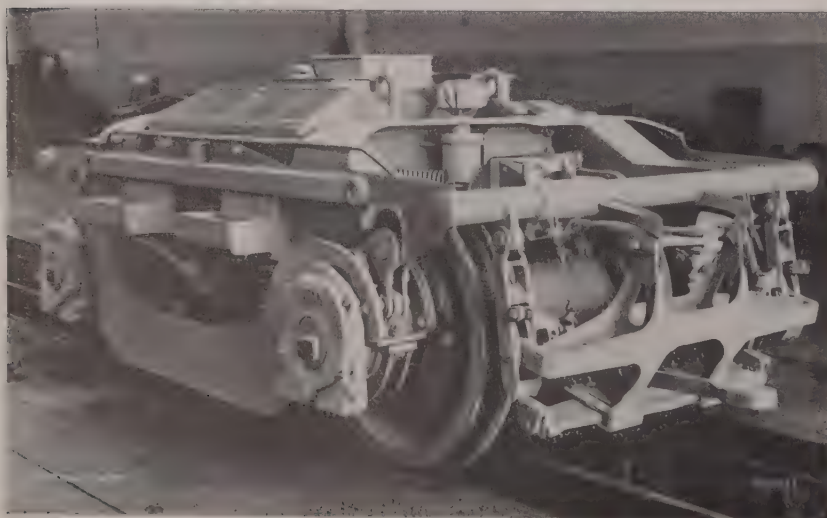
Single-motor bogie complete with motor and gearing, ready for assembly with the body of the motor-coach
